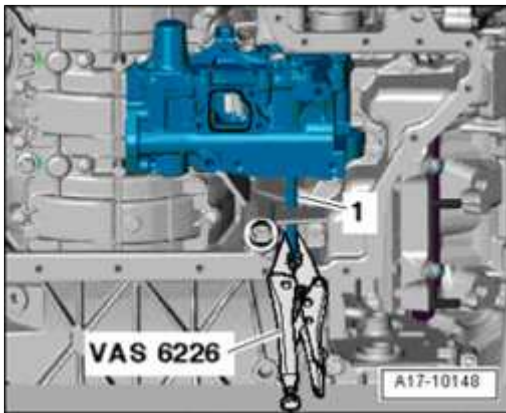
Pressing Back Drive Shaft For Oil Pump Against Spring Force And Clamping Tightly Using Long-Nose Gripping Pliers VAS 6226
